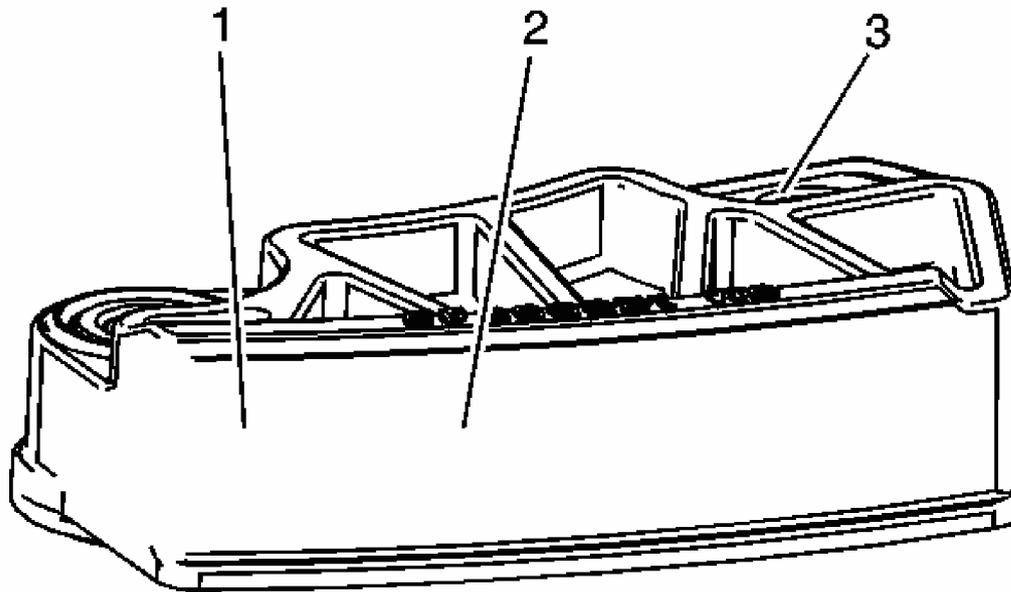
Inspecting Primary Timing Chain Lower Guide
